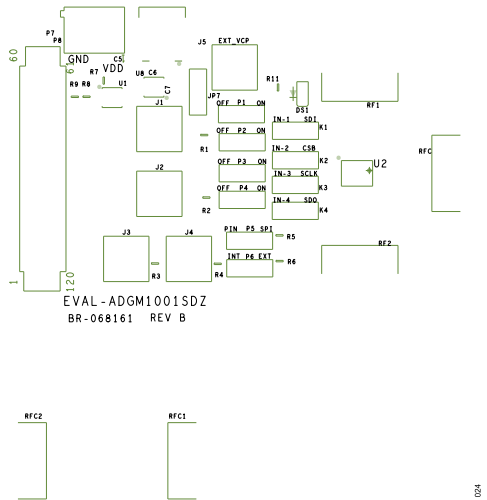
EVAL-ADGM1001SDZ Component Side Silkscreen PCB Drawing (Top)
